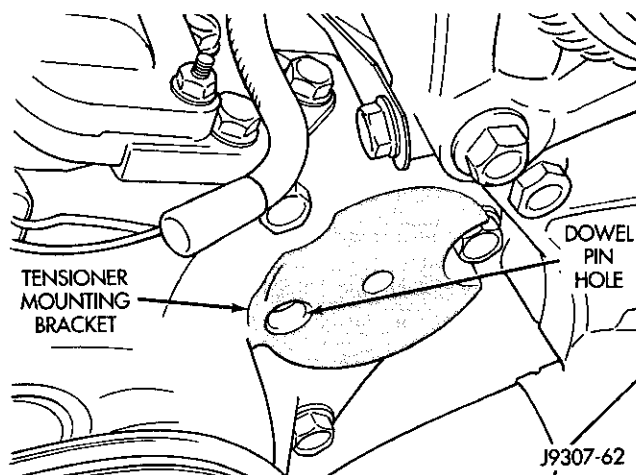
Tensioner Mounting Bracket Dowel Hole—5.9L HDC-Gas Engine
